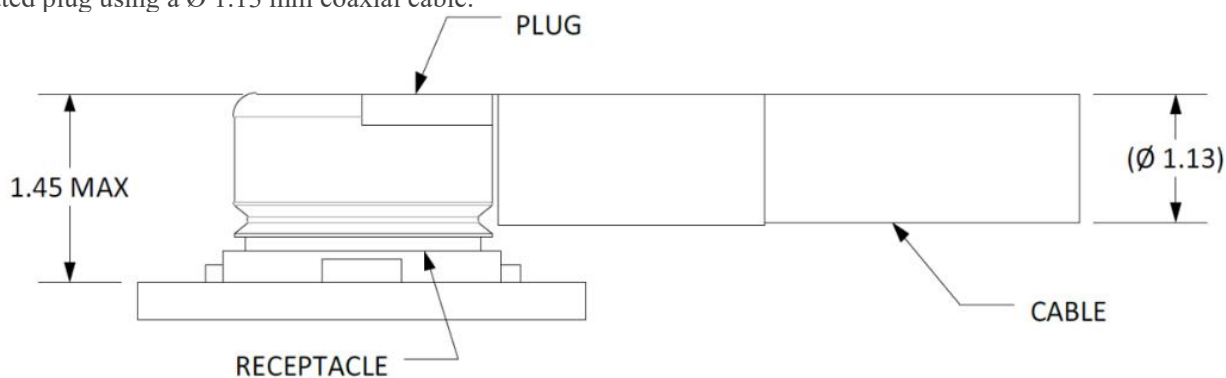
Space Factor of Mated Connectors (Ø 1.13 mm Coaxial Cables) (Unit: mm)
